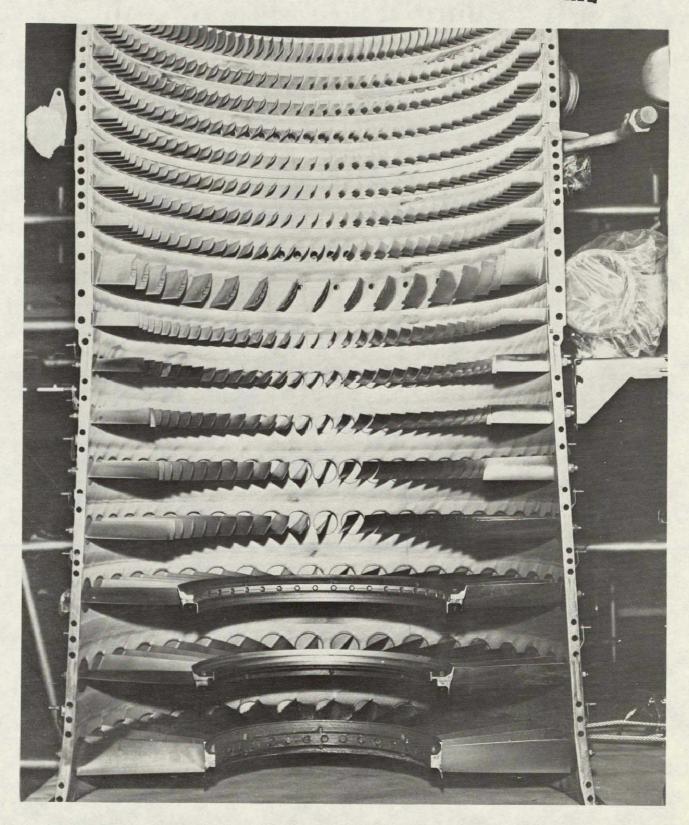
HP Compressor Stator Upper Overall Oil, Dirt, Rubs.
